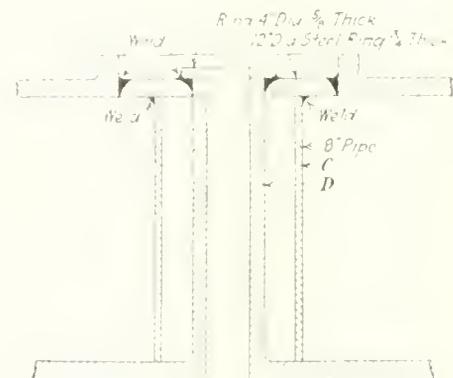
Details of Welds Used in Repairing Tender Transom Shown in Fig. 5
